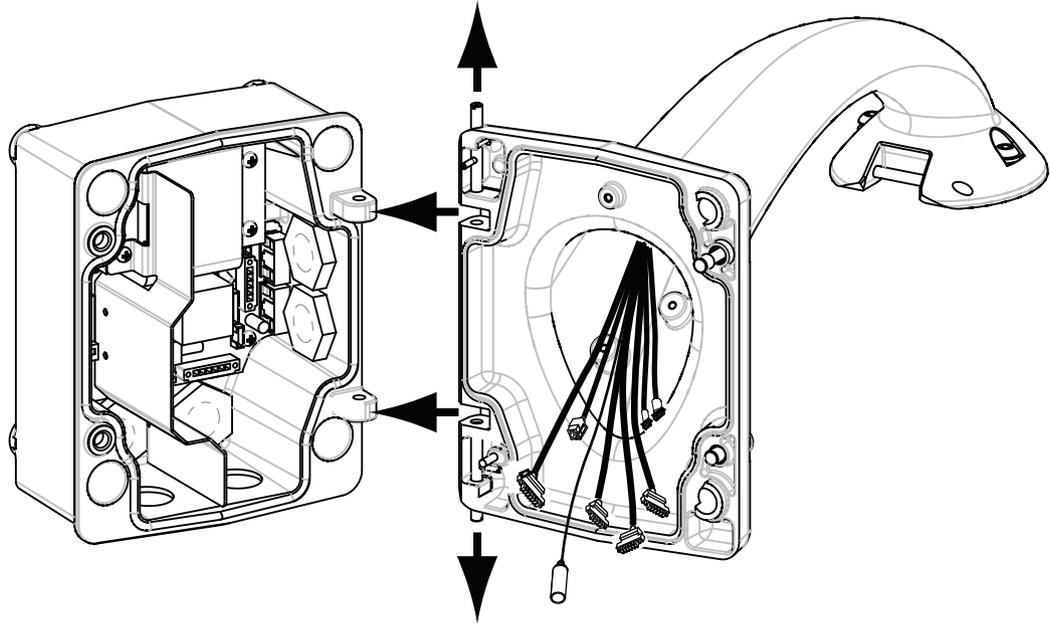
Pendant Arm to Power Box Hinge Alignment
